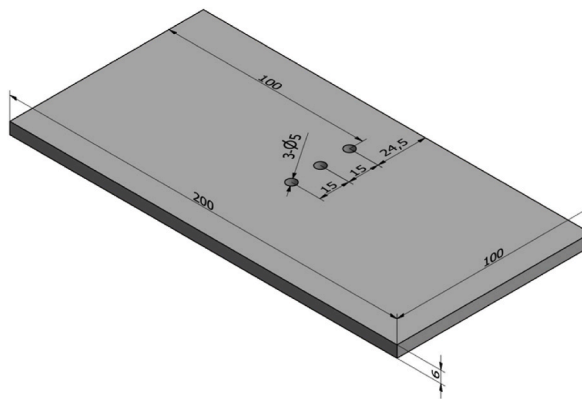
Dimensions of the Aluminum Alloy 6061 welding plate.
